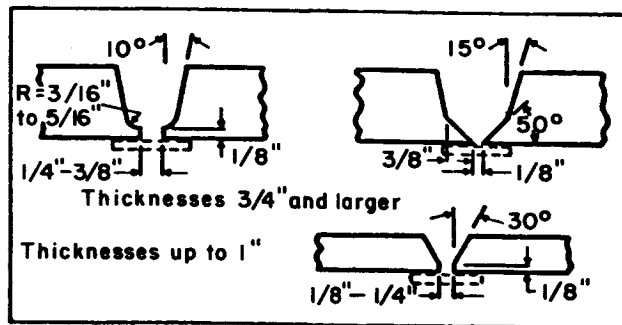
TYPICAL BUTT-WELD JOINT DESIGNS FOR SUBMERGED-ARC WELDING F (REF. 15)
